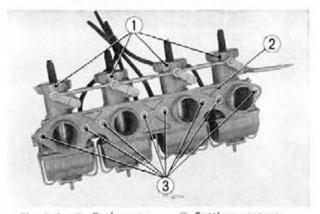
① Carburetor ③ Setting screws ② Carburetor stay plate
